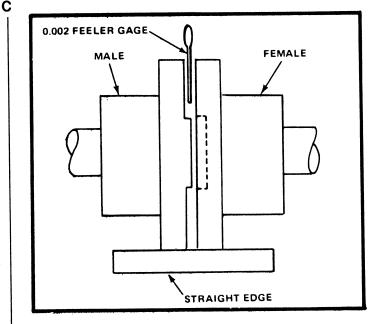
Checking Alignment (Parallelism) of Coupling and Propeller Flanges.
